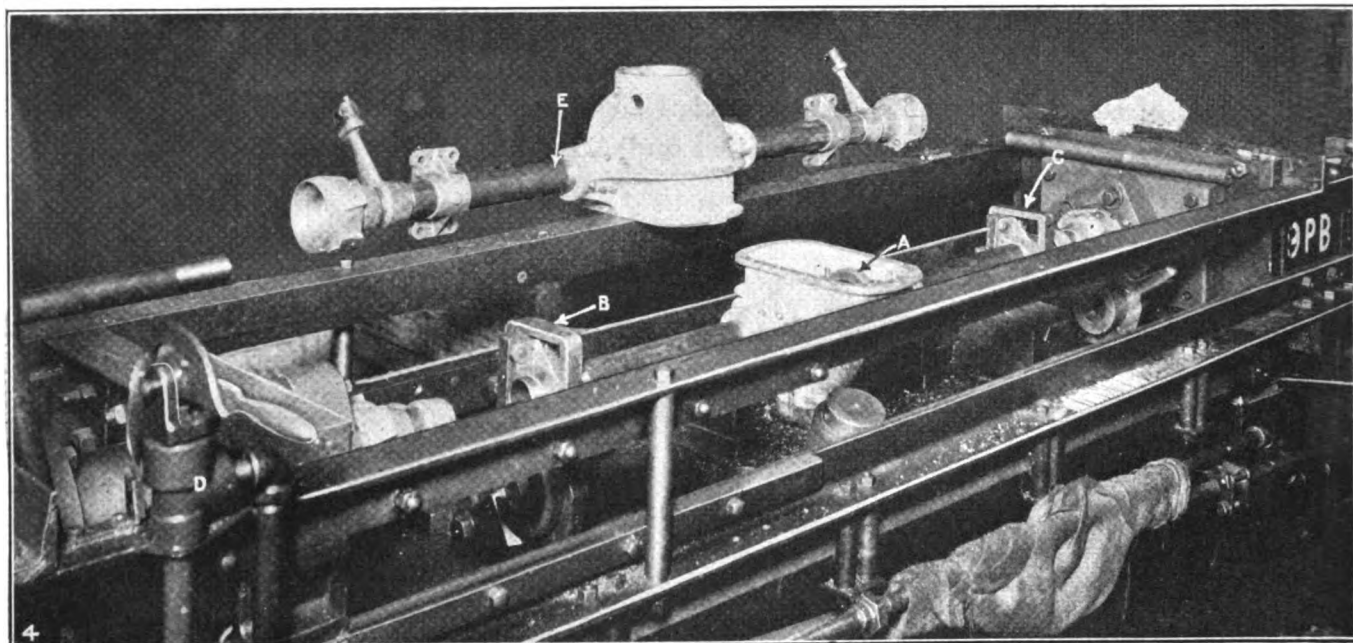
FORCING REAR AXLE HOUSING PARTS TOGETHER. FIG. 5—REAR AXLE PARTS AND AN ASSEMBLED AXLE.
